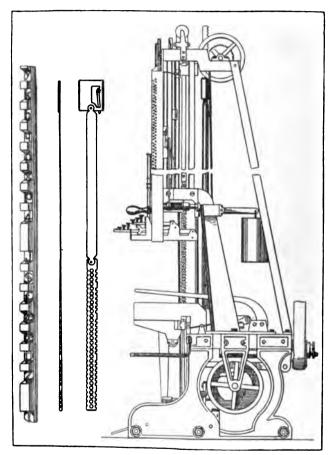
Linotype; original machine of 1884, with enlarged views of the multiple-strike matrix-bars used.
